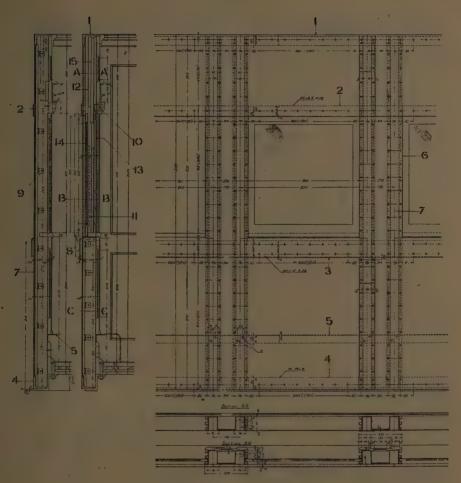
Section and elevation of second class day coach (side framing), Japanese Government Railways.
